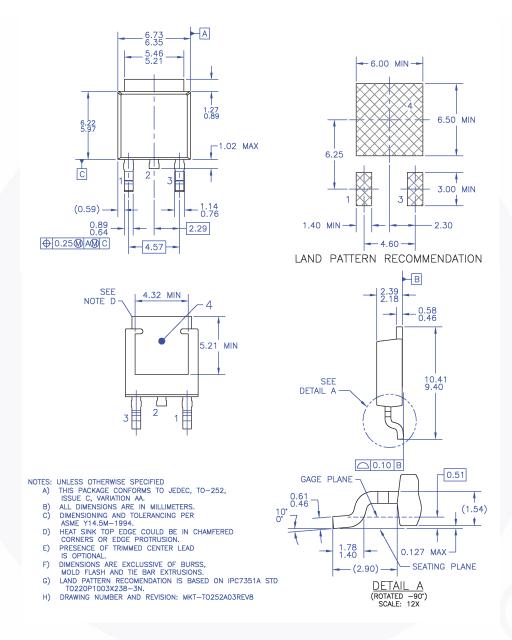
TO252 (D-PAK), Molded, 3-Lead, Option AA&AB
